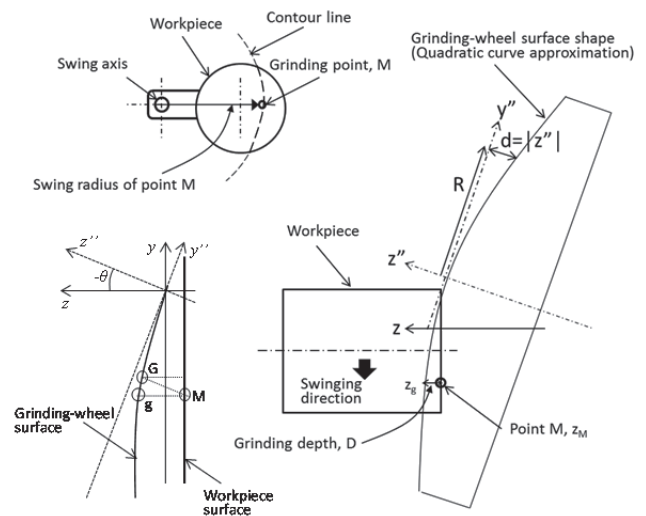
Relation between the tilted dressed-grinding-wheel and workpiece surface
